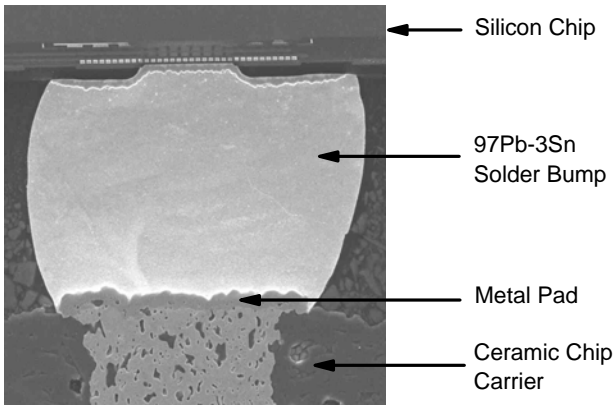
Vertical Cross Section of a flip chip solder bump (97Pb-3Sn) reflow attached to a metallized pad on the Ceramic Chip Carrier.
